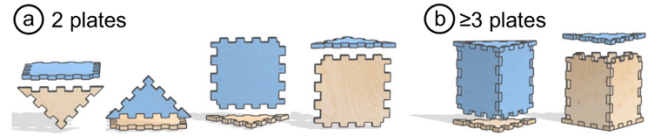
(a) There are generally four possible orientations for inserting a plate P into another single plate assembly, and (b) two, when the assembly already consists of two or more plates.
